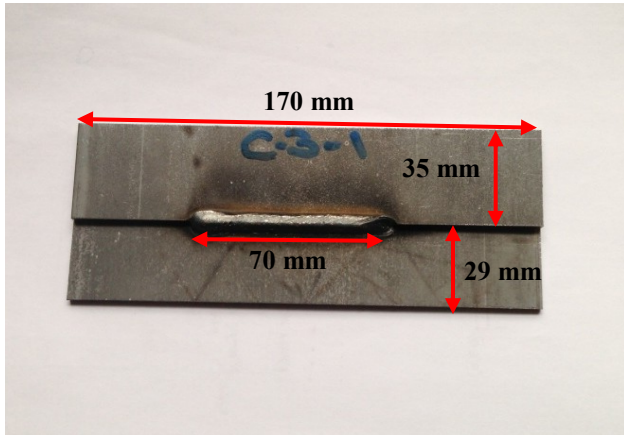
WELDED SAMPLE WITH NECESSARY DIMENSIONS.
